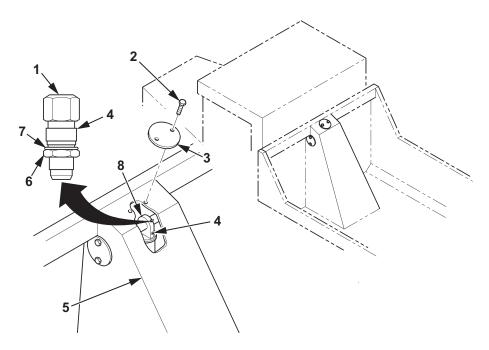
Hoist Cylinder Automatic Bleeder Valve Removal and Installation.
